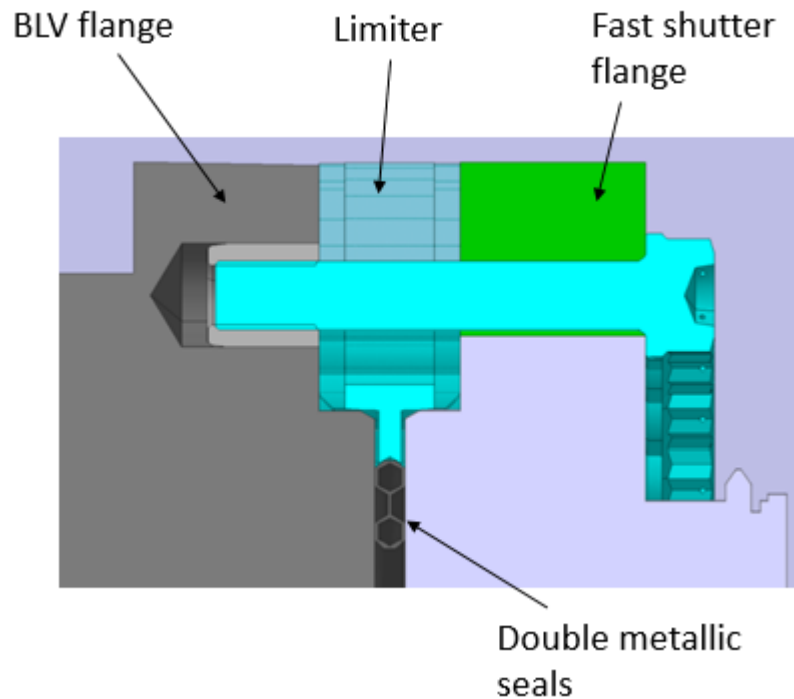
2D view of the sealing solution between BLV and fast shutter flange
